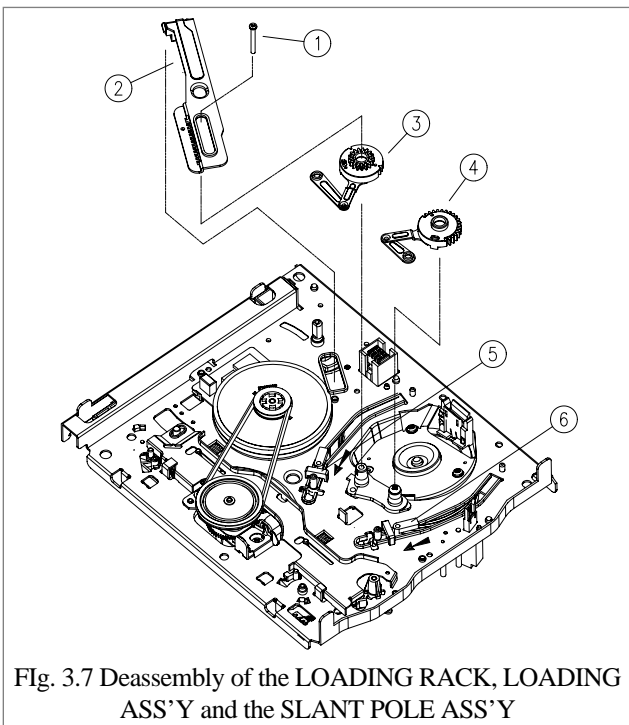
Deassembly of the LOADING RACK, LOADING ASS'Y and the SLANT POLE ASS'Y
